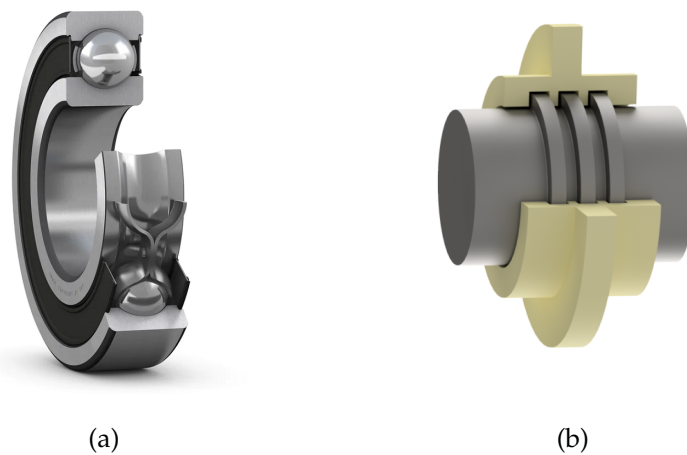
Examples of passive seals and shields: (a) ball bearing with rubber seal (black), courtesy of SKF [38], (b) labyrinth seal around the shaft.
